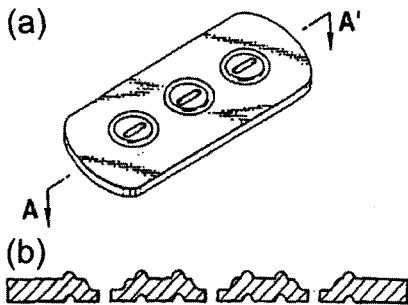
(a) Shape of pressed sheet for a part in electron gun, (b) Cross sectional shape along A-A in (a)
